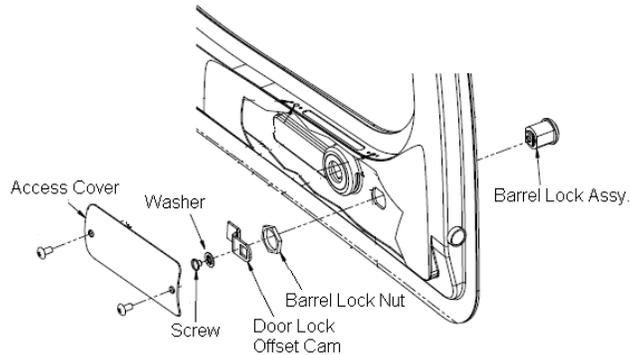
Exploded View of Door Lock Assembly(Port Side Shown)
